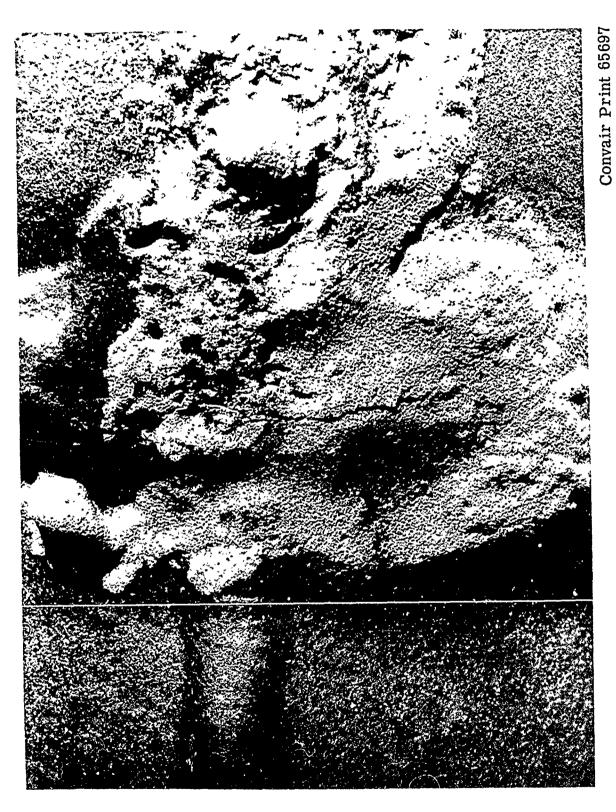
ENGINE-BLEED AIR DUCT; Burst Test Failure of Butt, Fusion-Welded Static Test Specimen.
